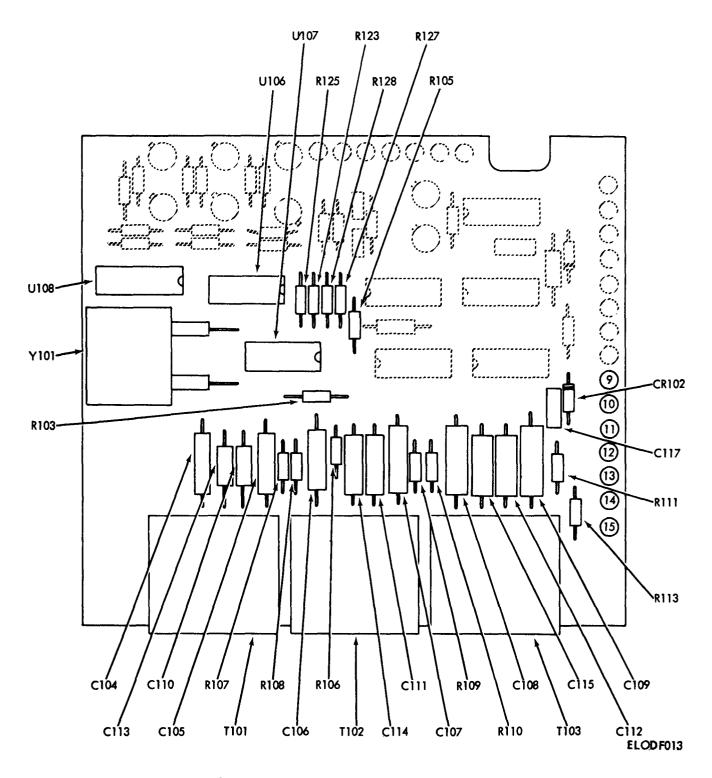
②. Oscillator printed circuit board assembly (A1) (sheet 2 of 2).
